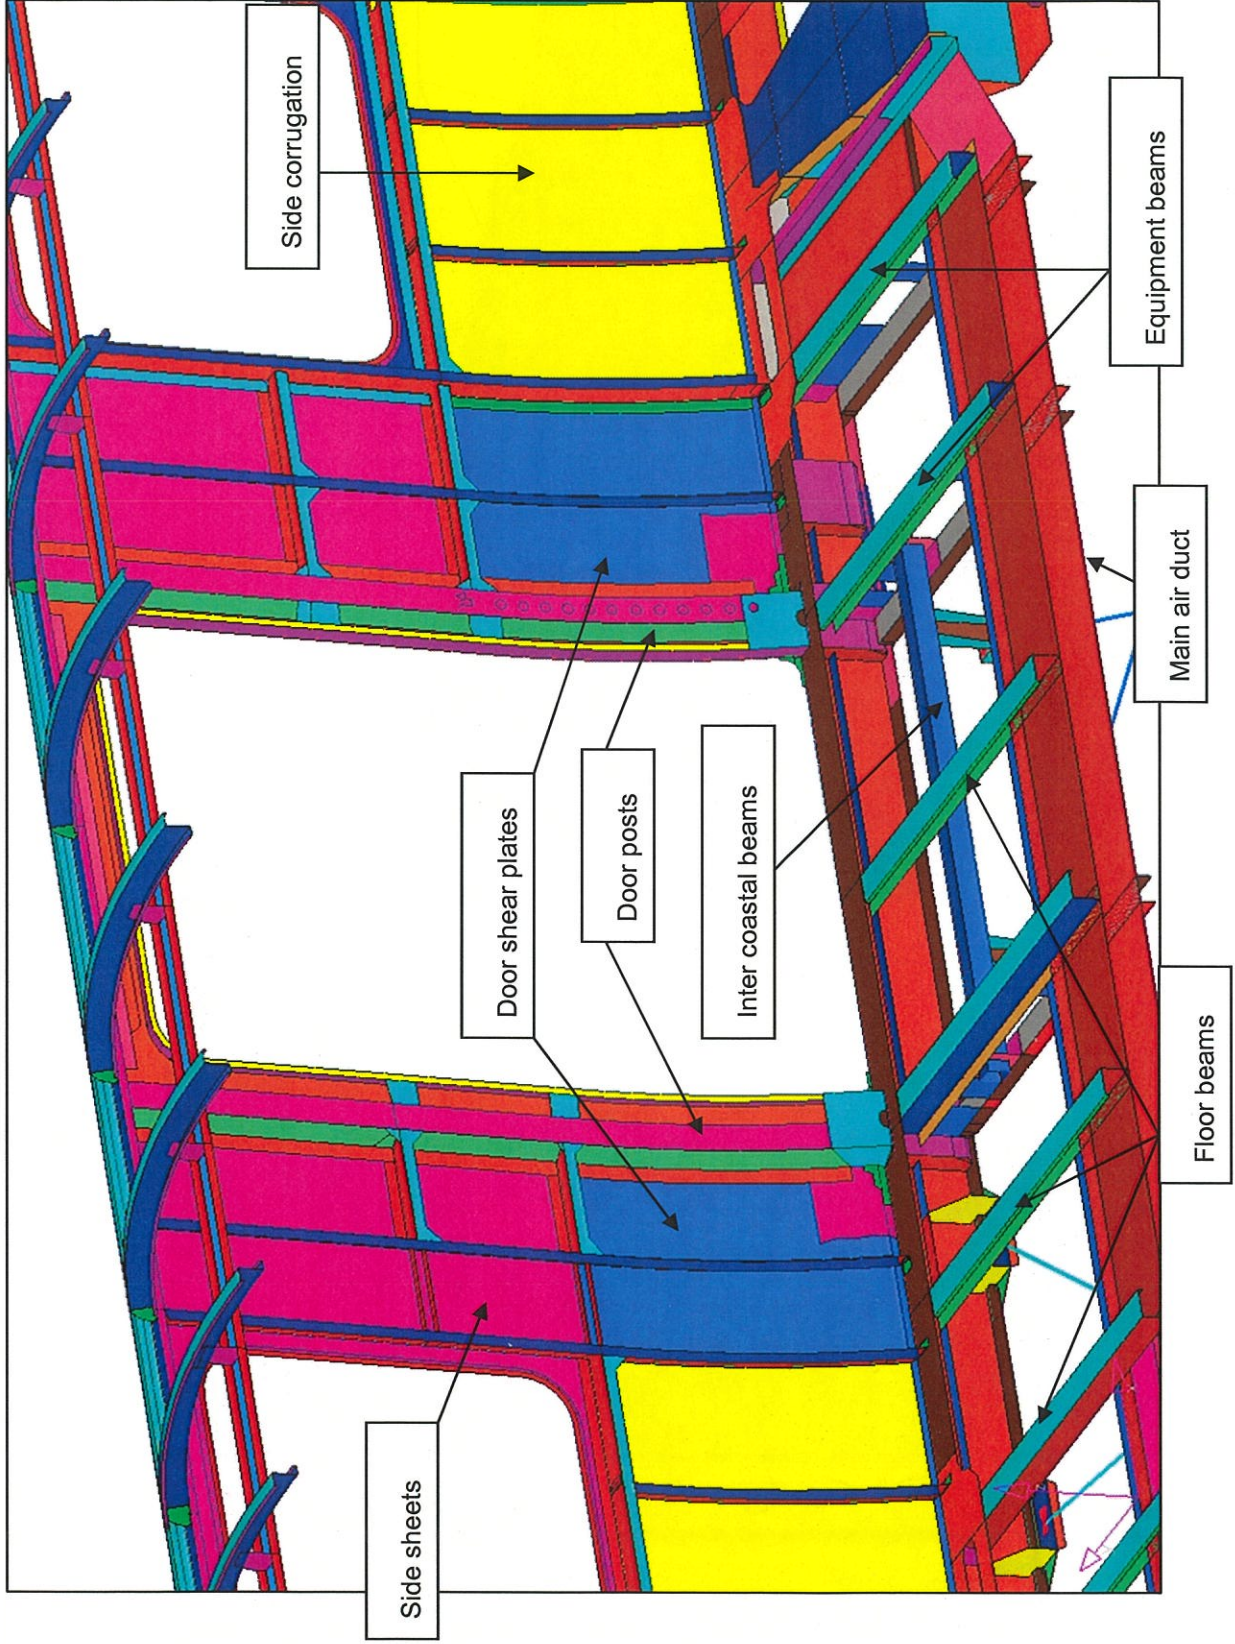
FEA of Door area and underframe details (plymetal and subfloor not shown).
